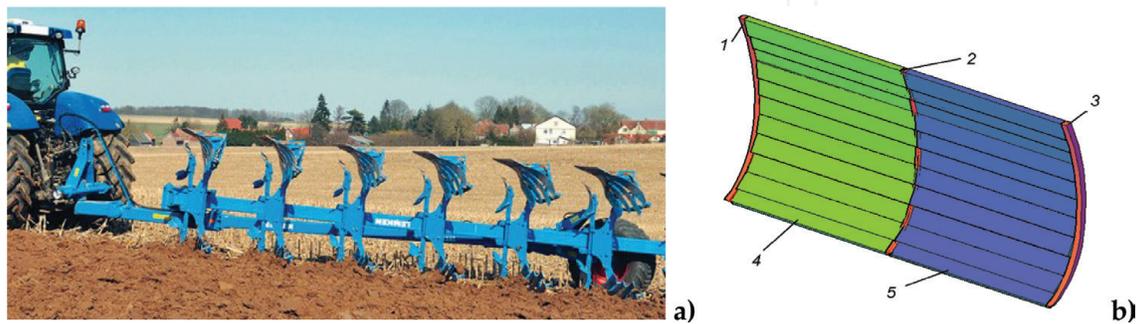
Plate construction of plow (a) and bulldozer (b) mold board: 1—right, 2—middle and 3—left guiding frames, 4—right and 5—left formative plates (*construction offered by author).
